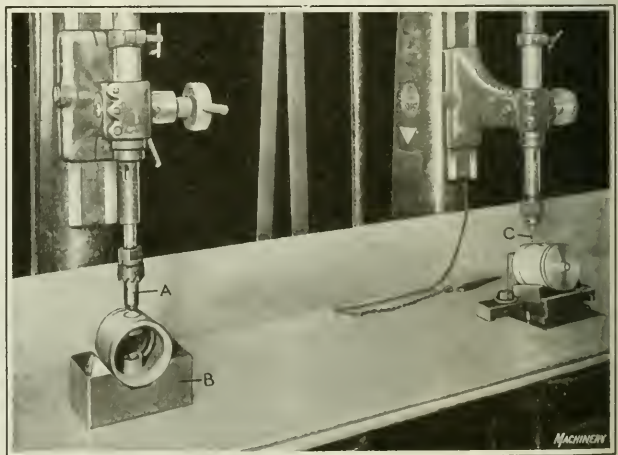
Drilling Machine equipped for chamfering the Outer Ends of the Wrist-pin Holes, and for drilling Four Oil-holes in the Lower Ring Groove
